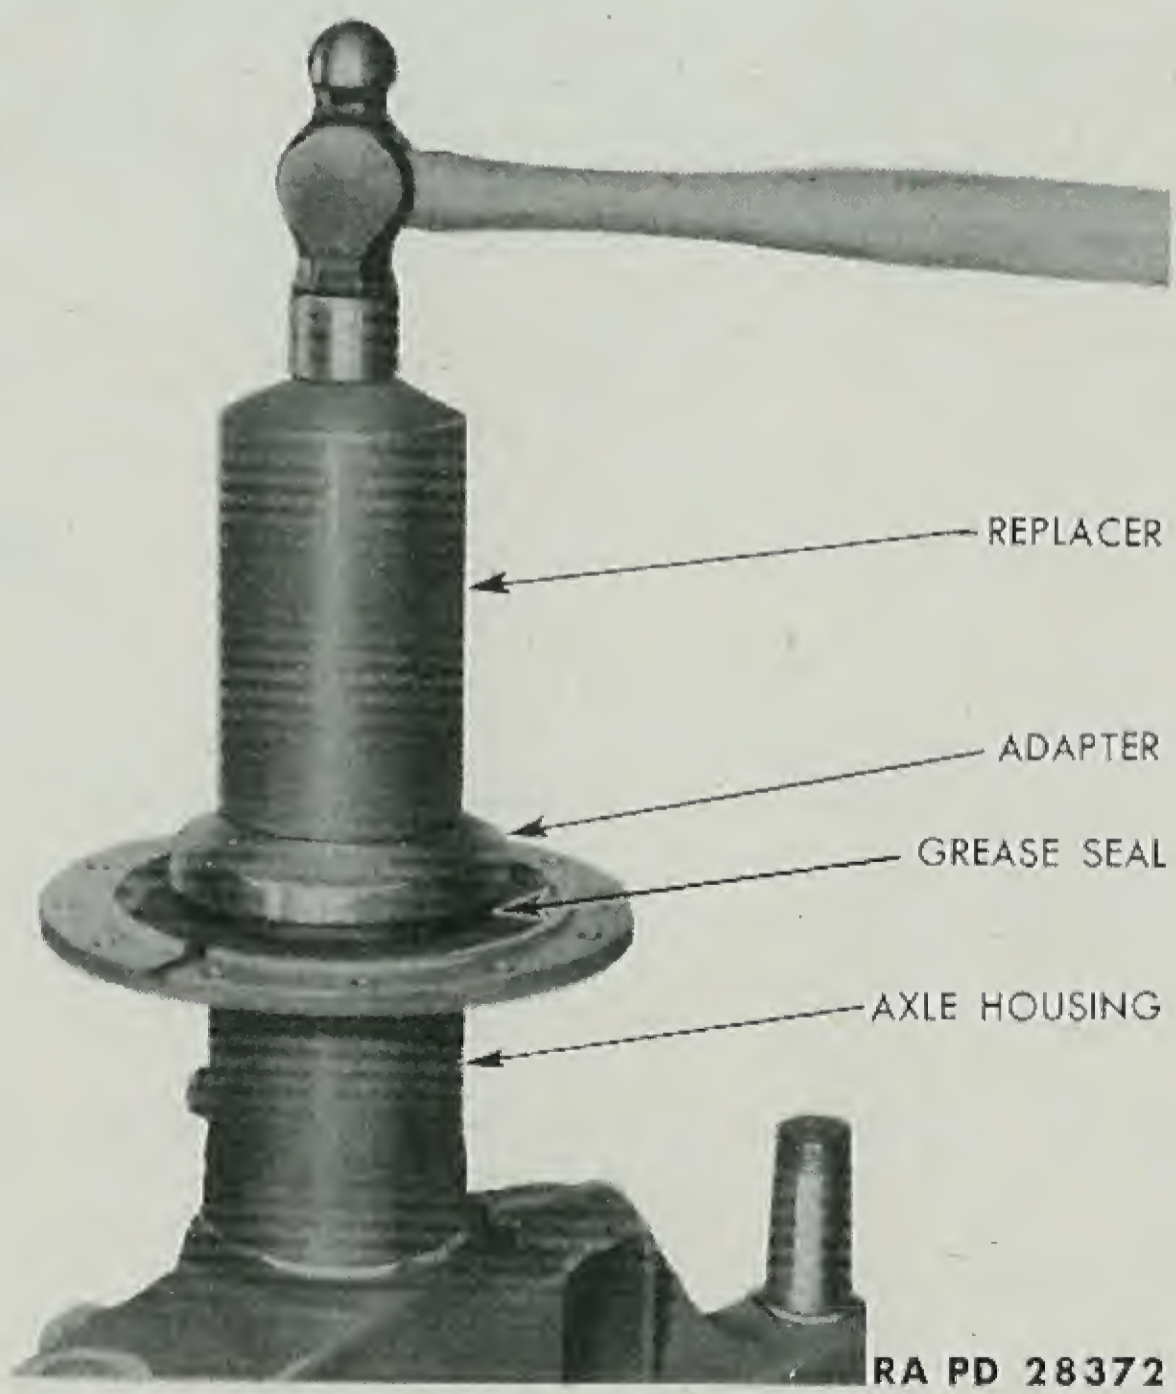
Driving Hub Inner Bearing Grease Seal on Axle Housing
